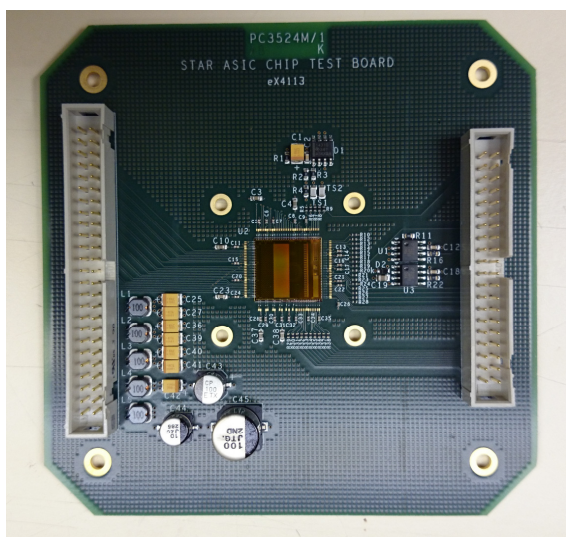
Prototype STAR ASIC bonded to a carrier PCB.
